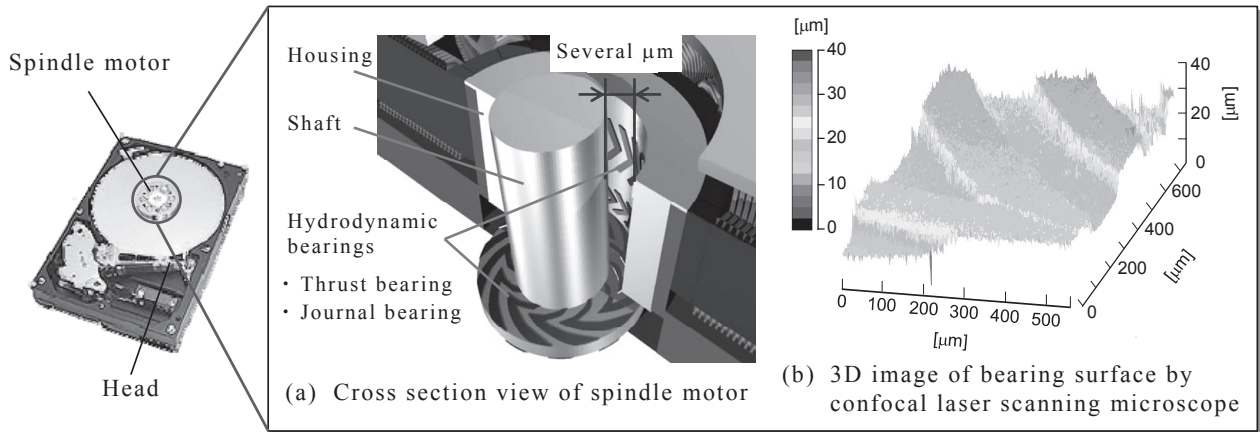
A Spindle motor used for 2.5 inch hard disk drive
